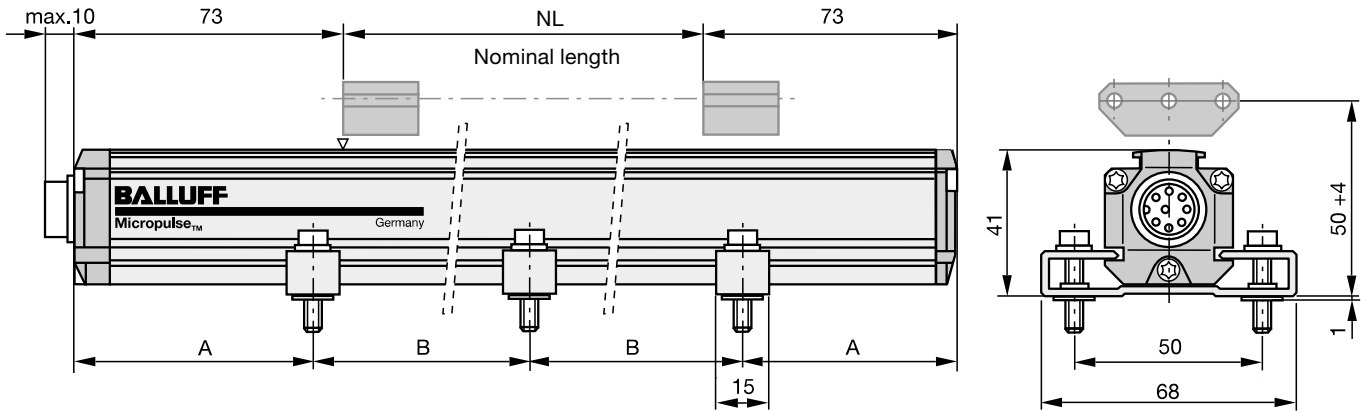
Dimensional drawing for BTL5...P-S32 (with magnet BTL5-P-3800-2)
